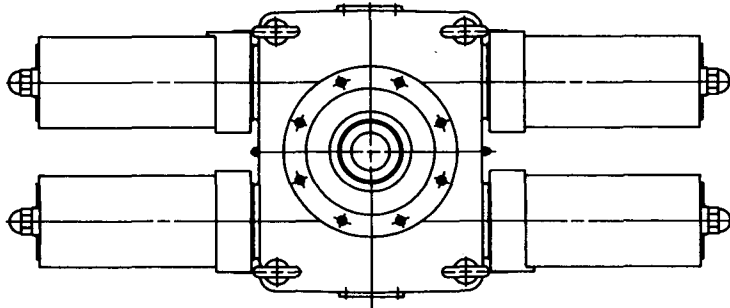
ON-OFF CONTROL BY SOLENOID VALVE : AIR FAILURE AIR FAILURE POSITION LOCK
